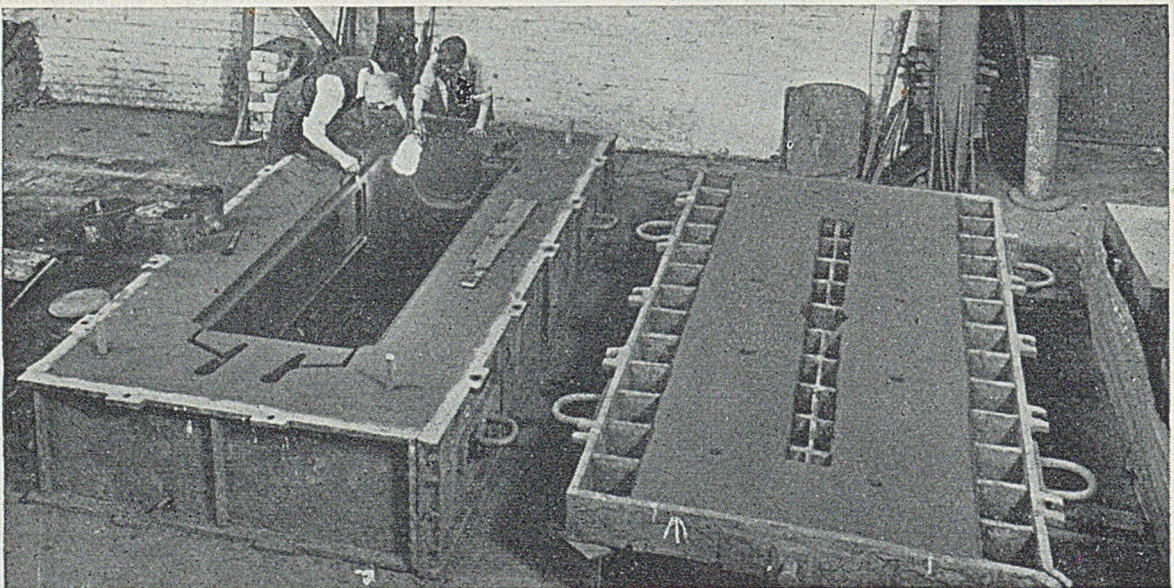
Mould for the Diesel-engine Frame being Finished-off, prior to Drying, Coring, Closing and Casting.
